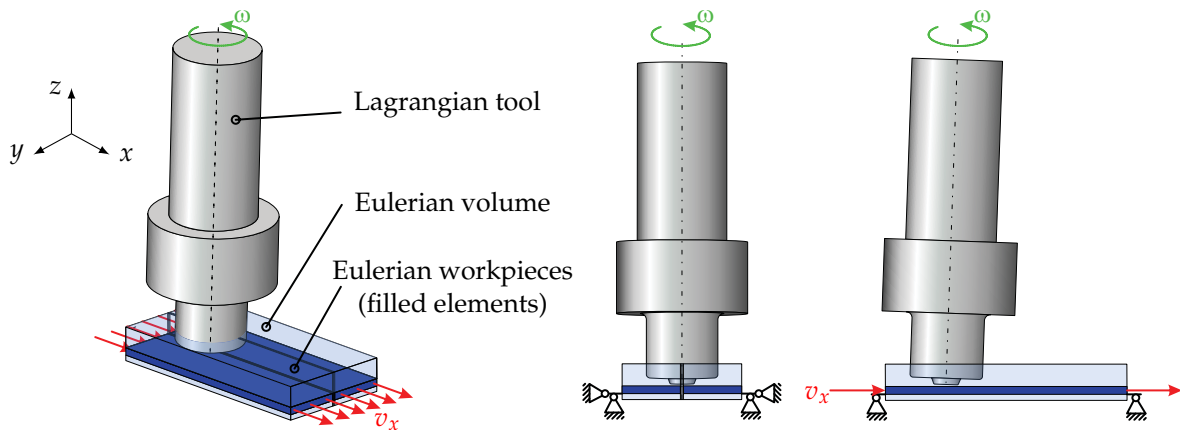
Schematic setup of the numerical model (starting position): isometric, front and side view, shown without tool holder, backing and clamping.
